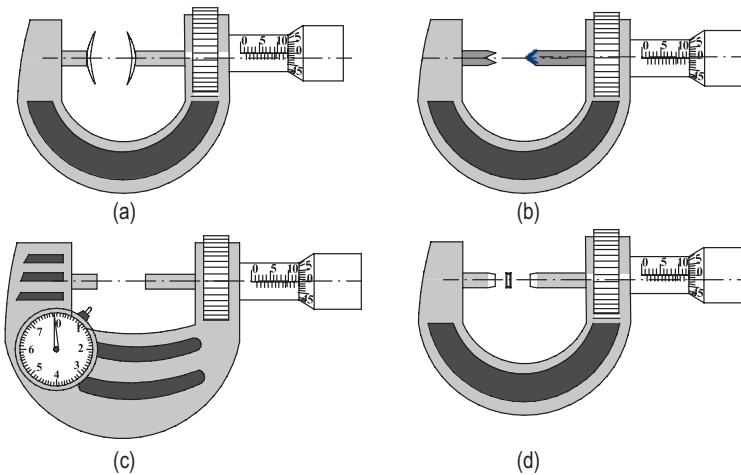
Types of micrometers (a) Disk type (b) Screw thread type (c) Dial type (d) Blade type
